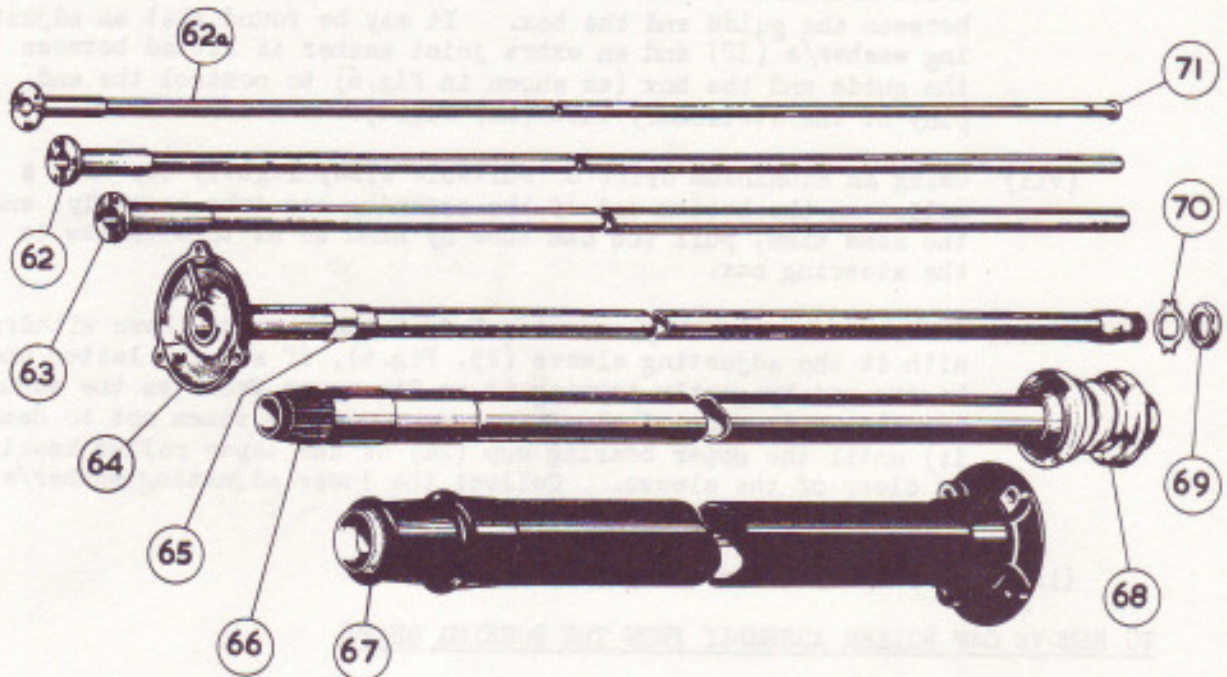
"EXPLODED" VIEW OF STEERING COLUMN.
